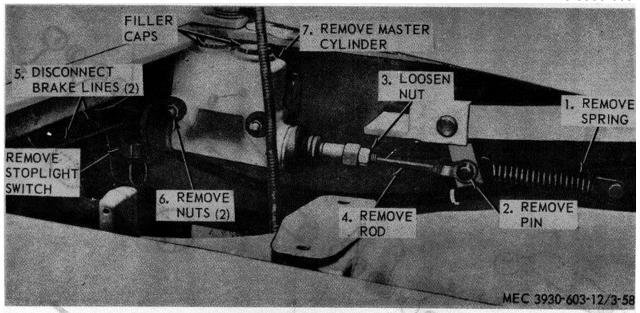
Master cylinder, assembly ,removal and, and installation
